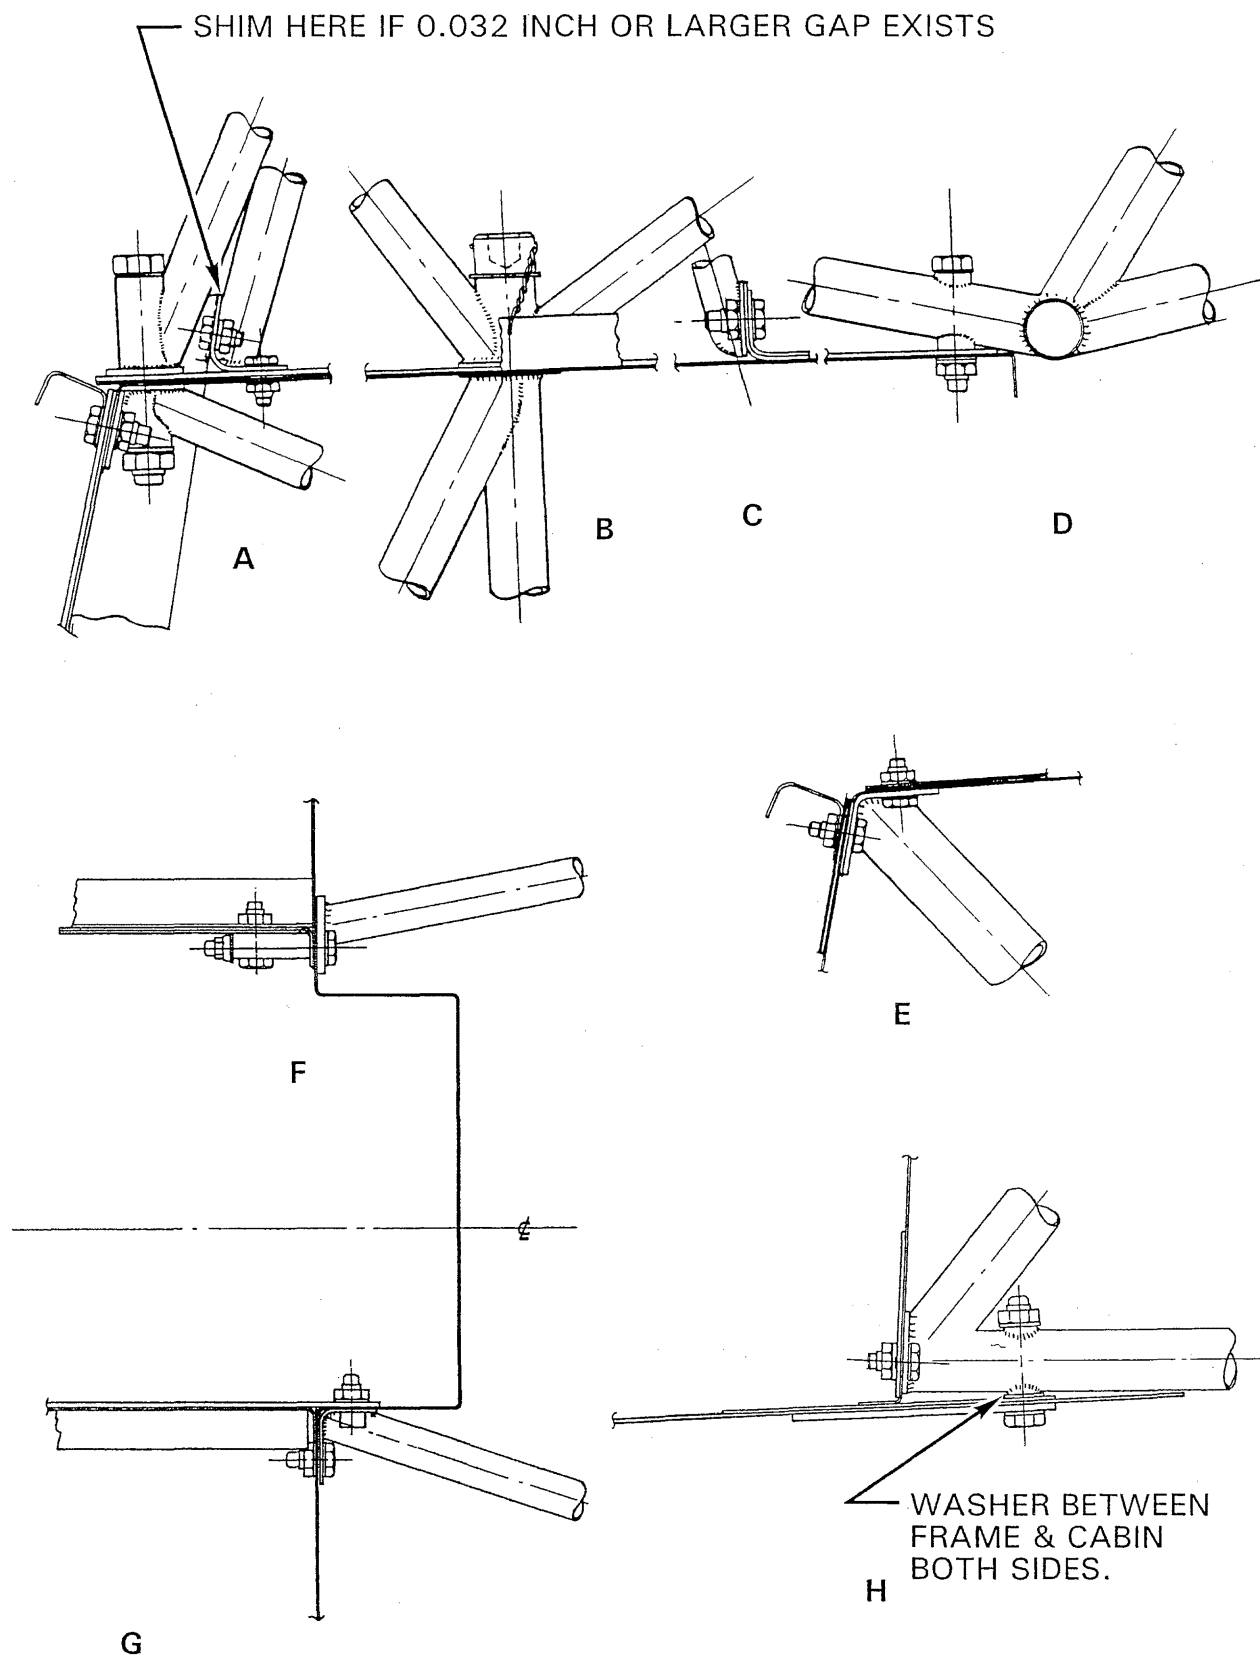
FRAME-TO-CABIN ATTACHMENTS
